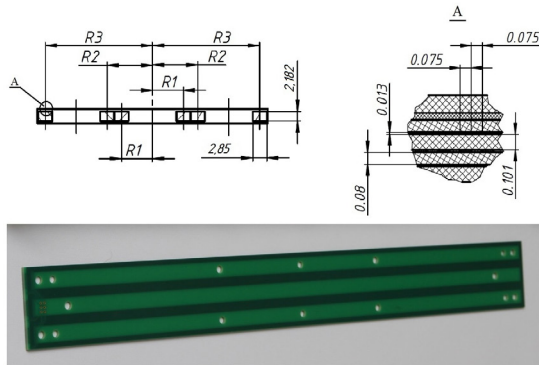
Cross section view of PCB with harmonics coils and photo of PCB.
